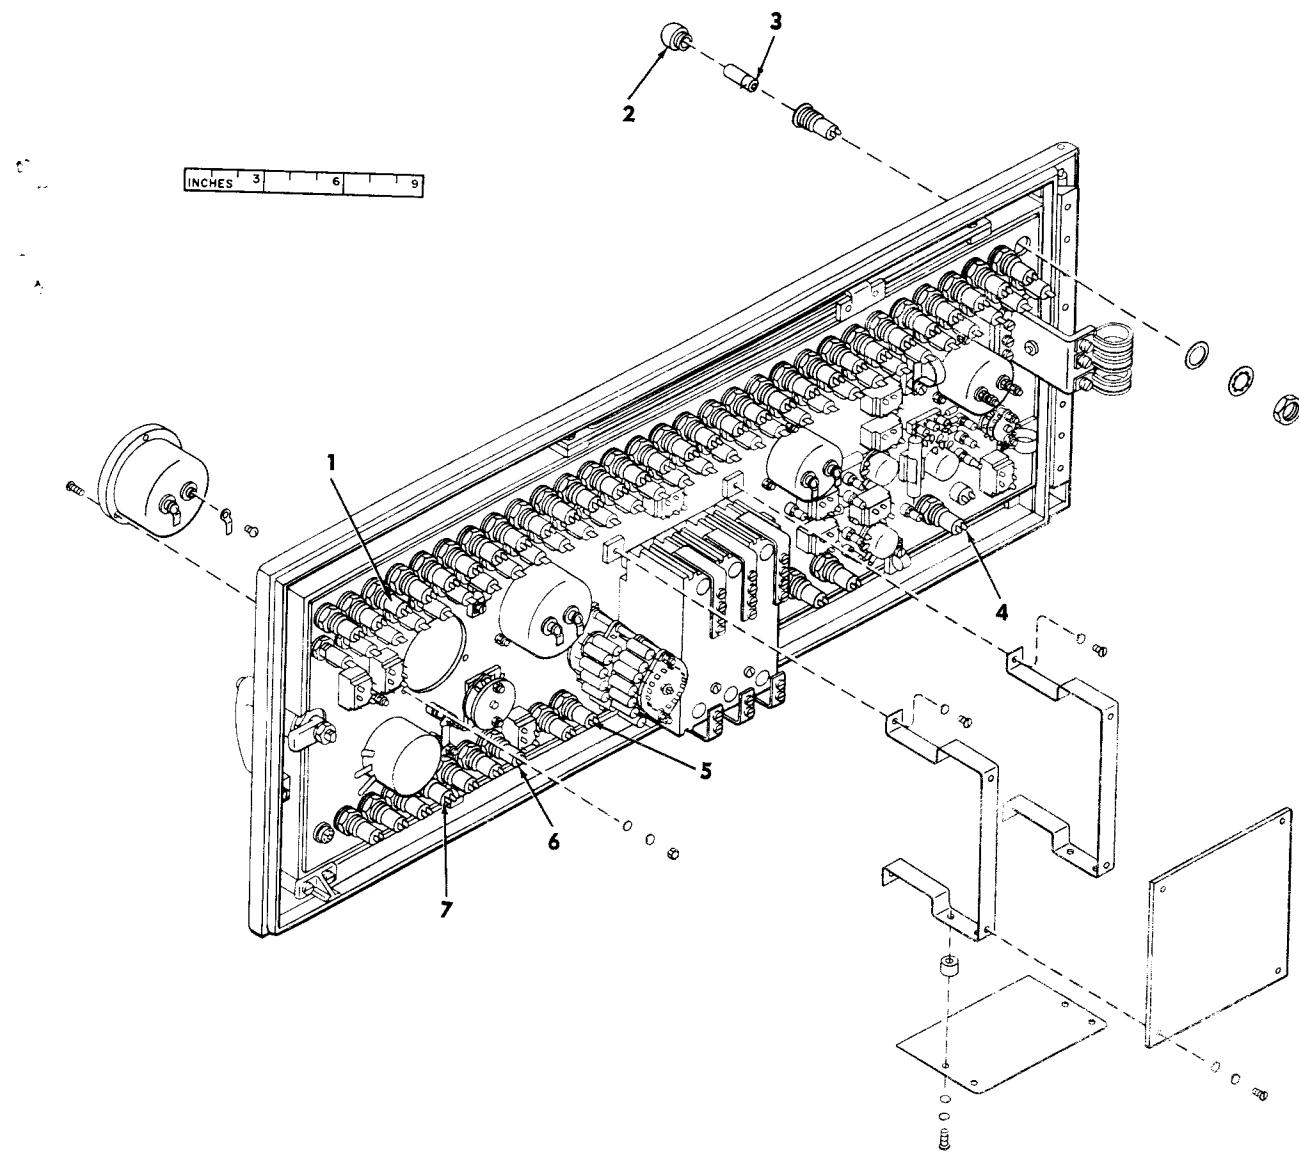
Control, receiver-transmitter (9141310) – partial exploded view
